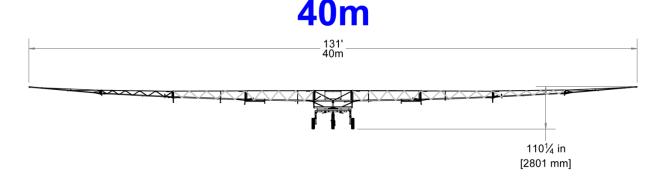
Overall Dimensions 3 Wheel Irrigation Booms
